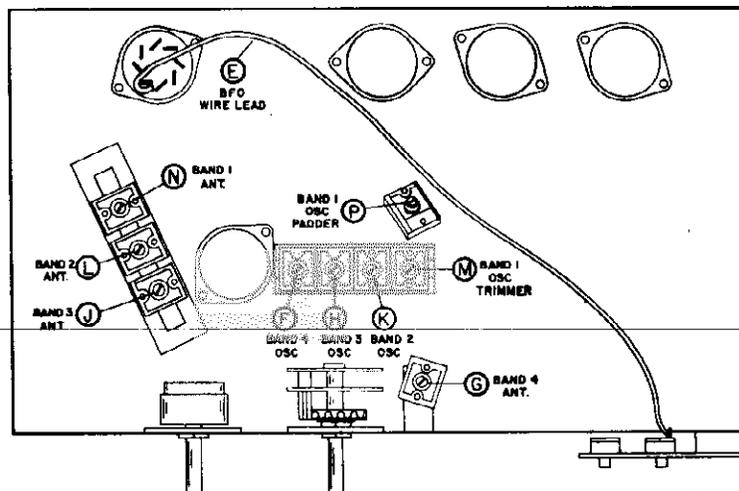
Bottom View of Chassis Showing Location of Alignment Adjustments
